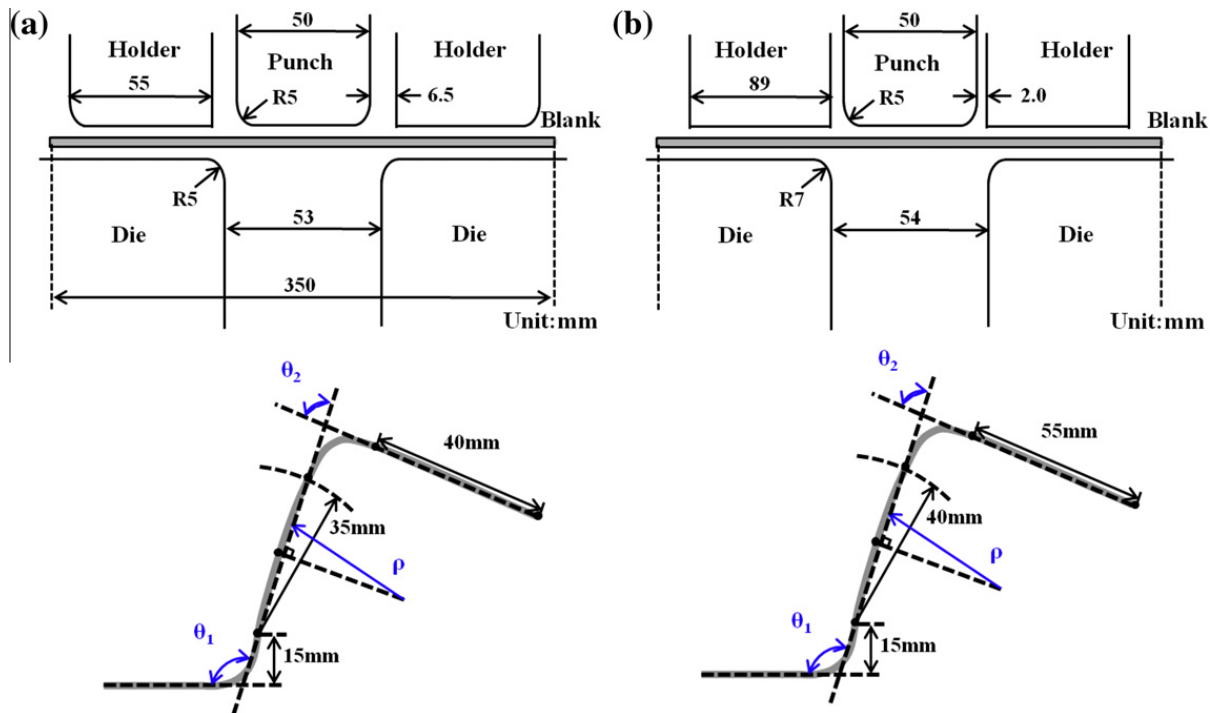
Tool geometry and measurement of springback for (a) TRIP780 and (b) DP780 steel sheets.
